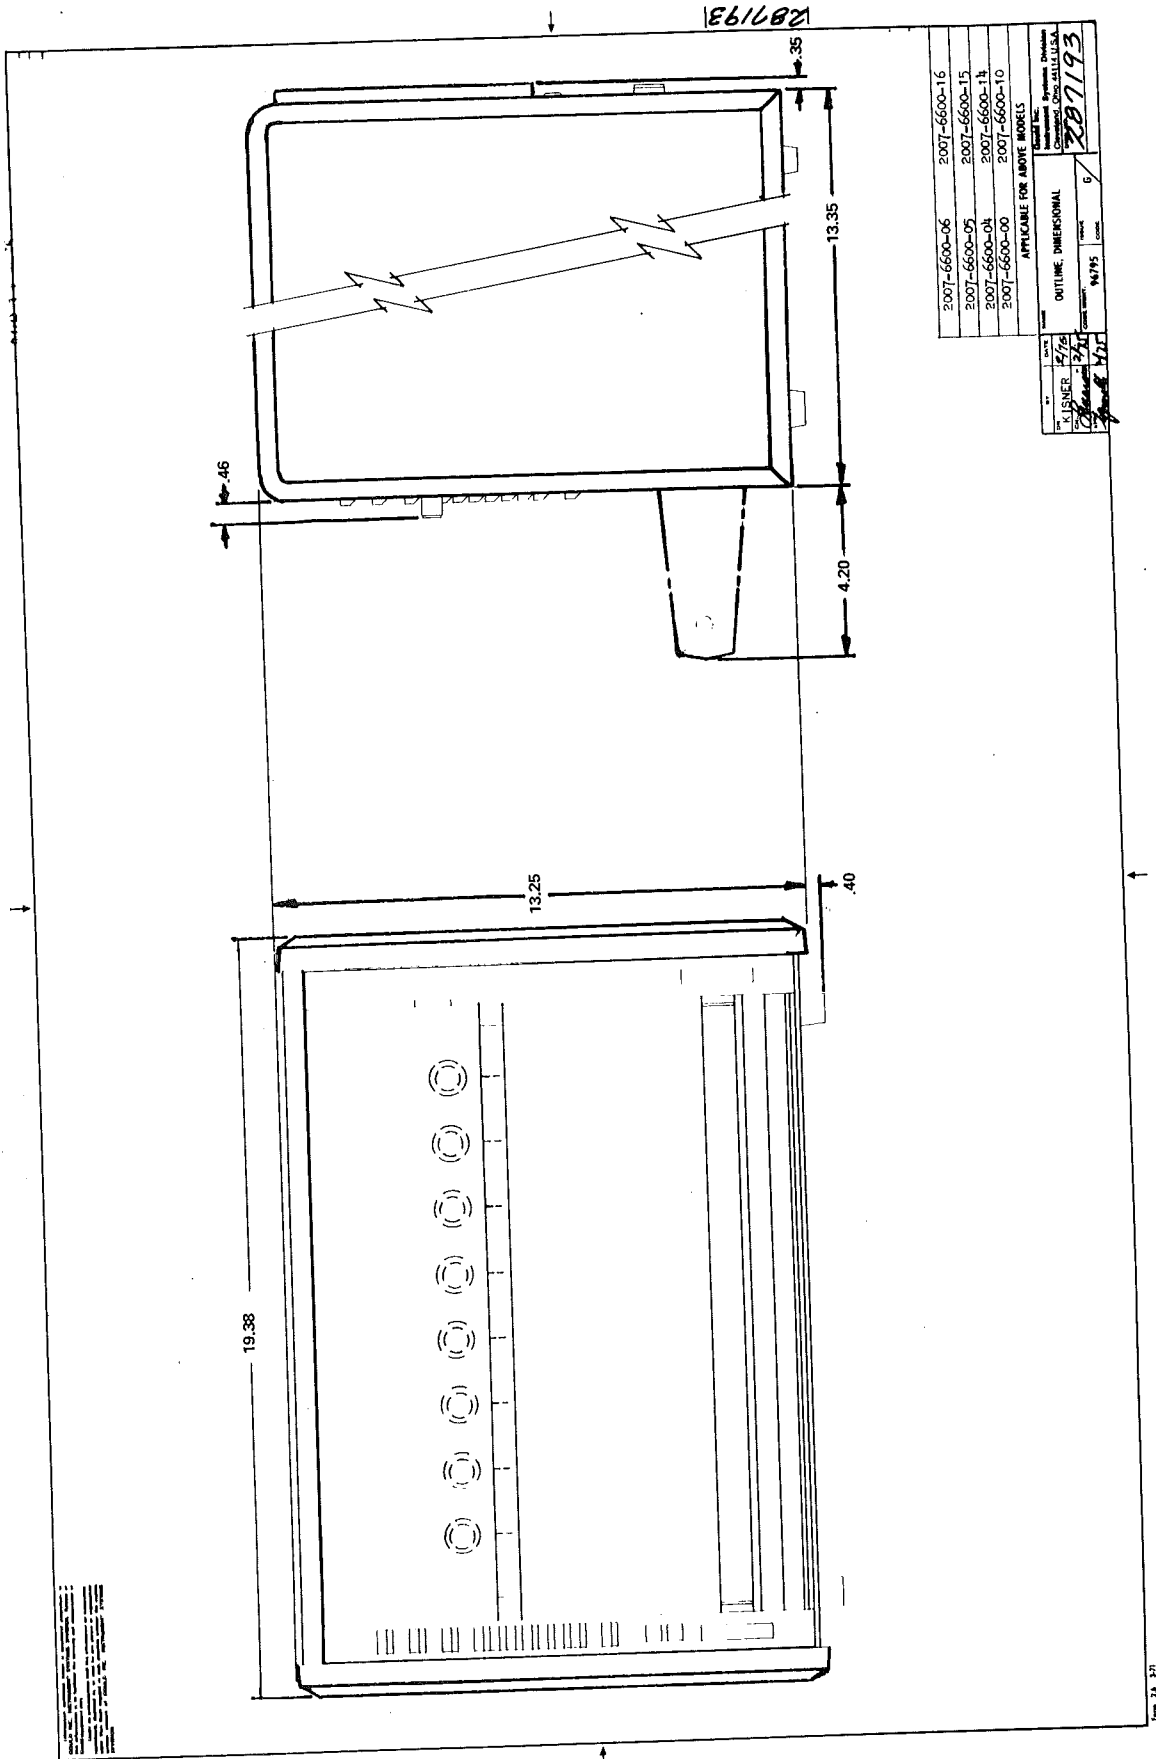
OUTLINE DIMENSIONS - 2600 SERIES
